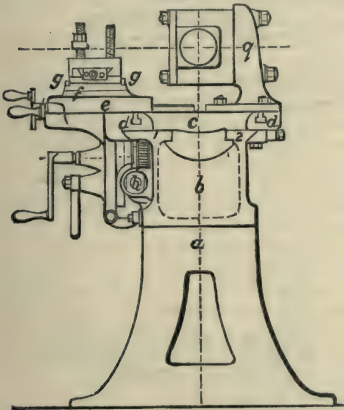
is a section of the releasing motion to the tool-slide, Fig. 5222 an end view of the head-stock showing the reversing motion, and Fig. 5223 the mandrel with steel bushes, cone, and
